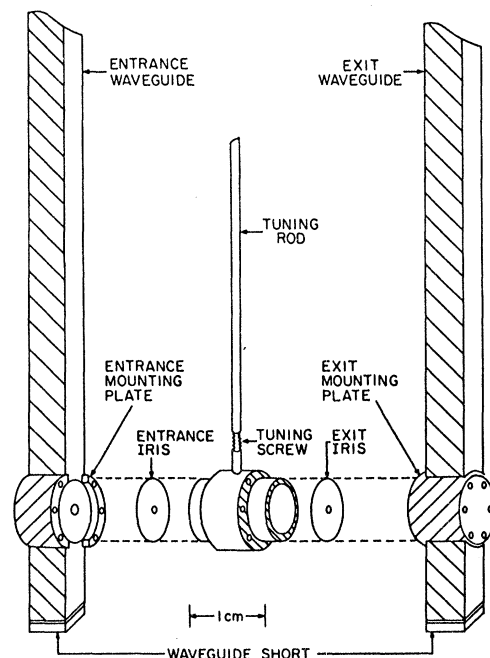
Exploded view of the sample cavity. When used in reflection, the exit iris is replaced by a solid disk.
